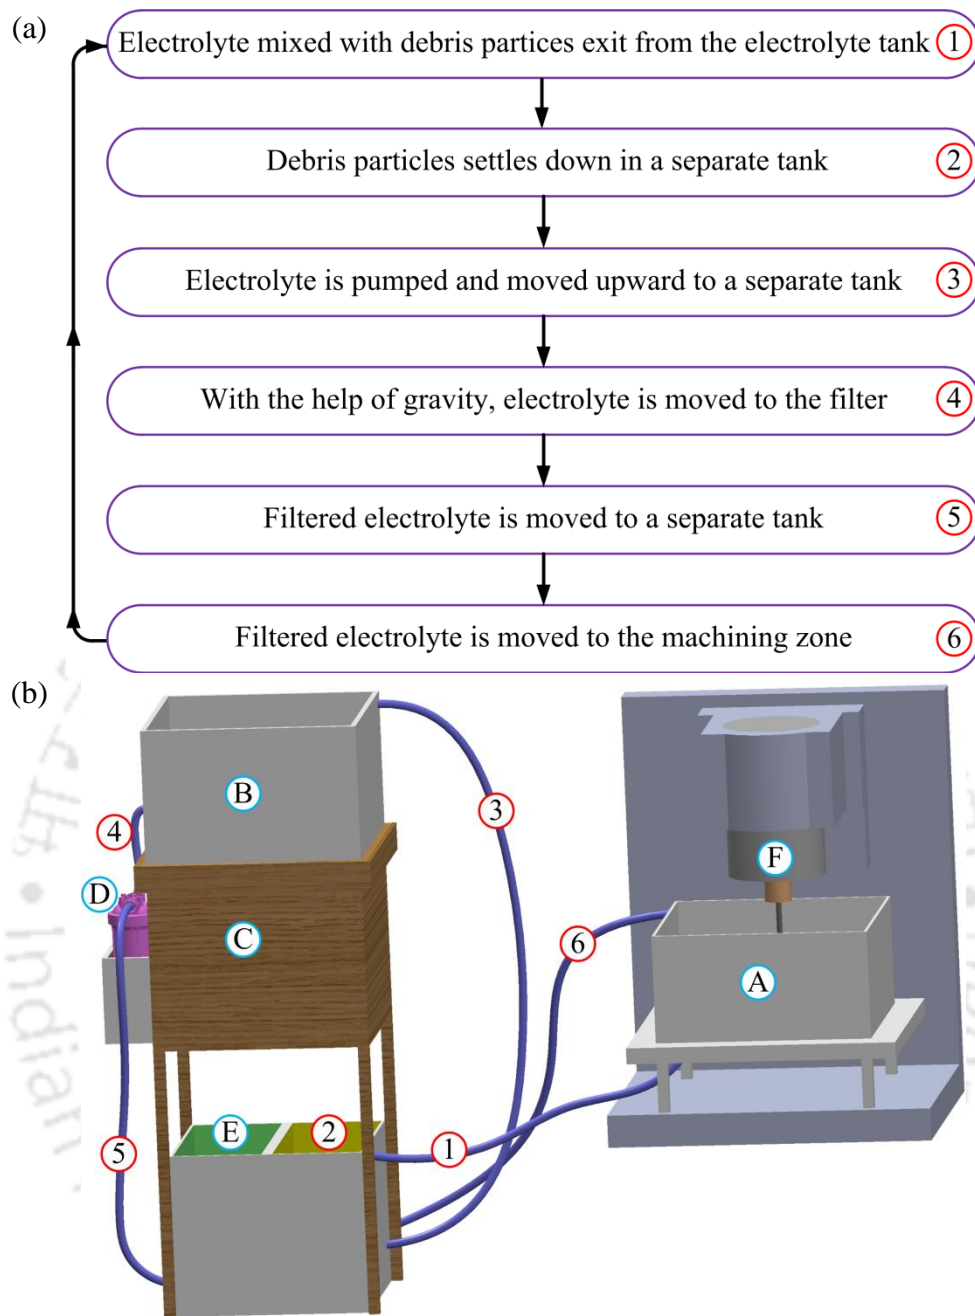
Electrolyte filtration unit (a) Flow chart, (b) schematic of setup, where A- machining chamber, B- electrolytic container with no debris, C- wooden table, D- filter, E- container having filtered electrolyte, and F- spindle & tool assembly
